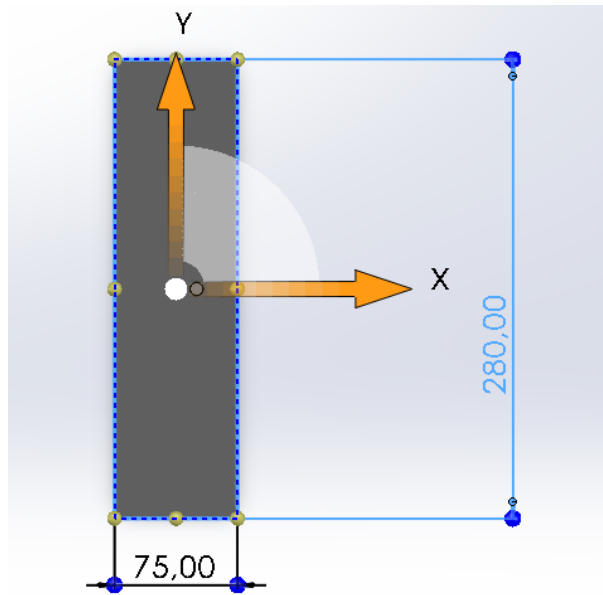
Dimensions in mm of the top POM casting on the movable stairs, seen from above.
